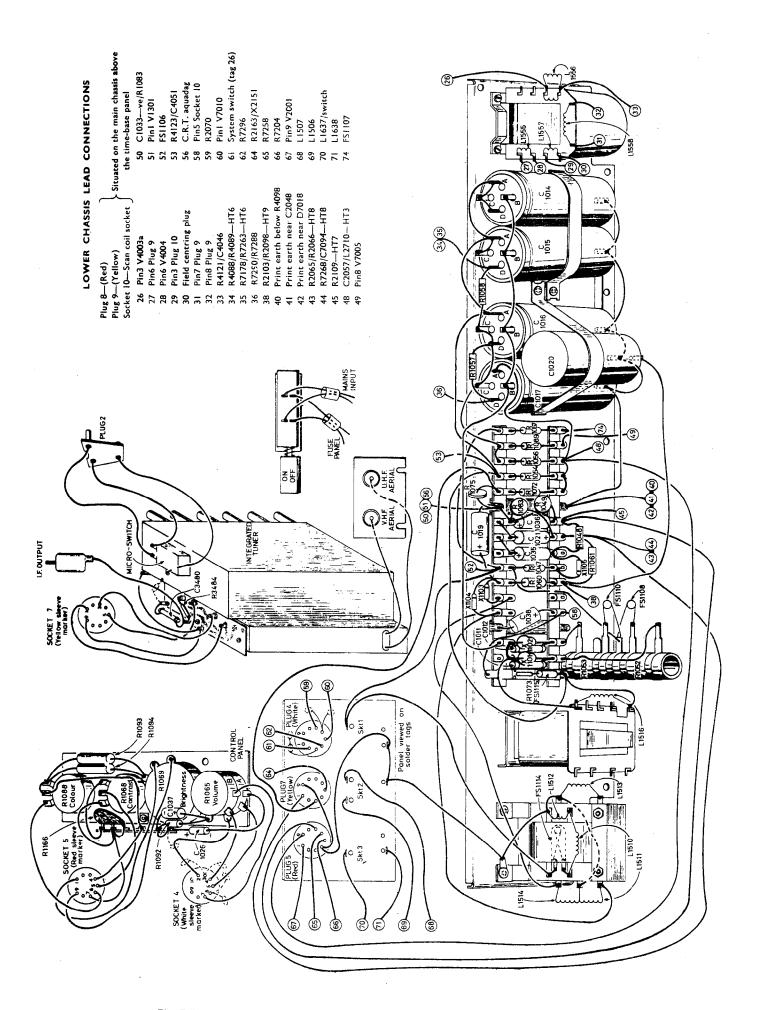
Wiring to the lower chassis (power supply circuits), control panel and tuner.
